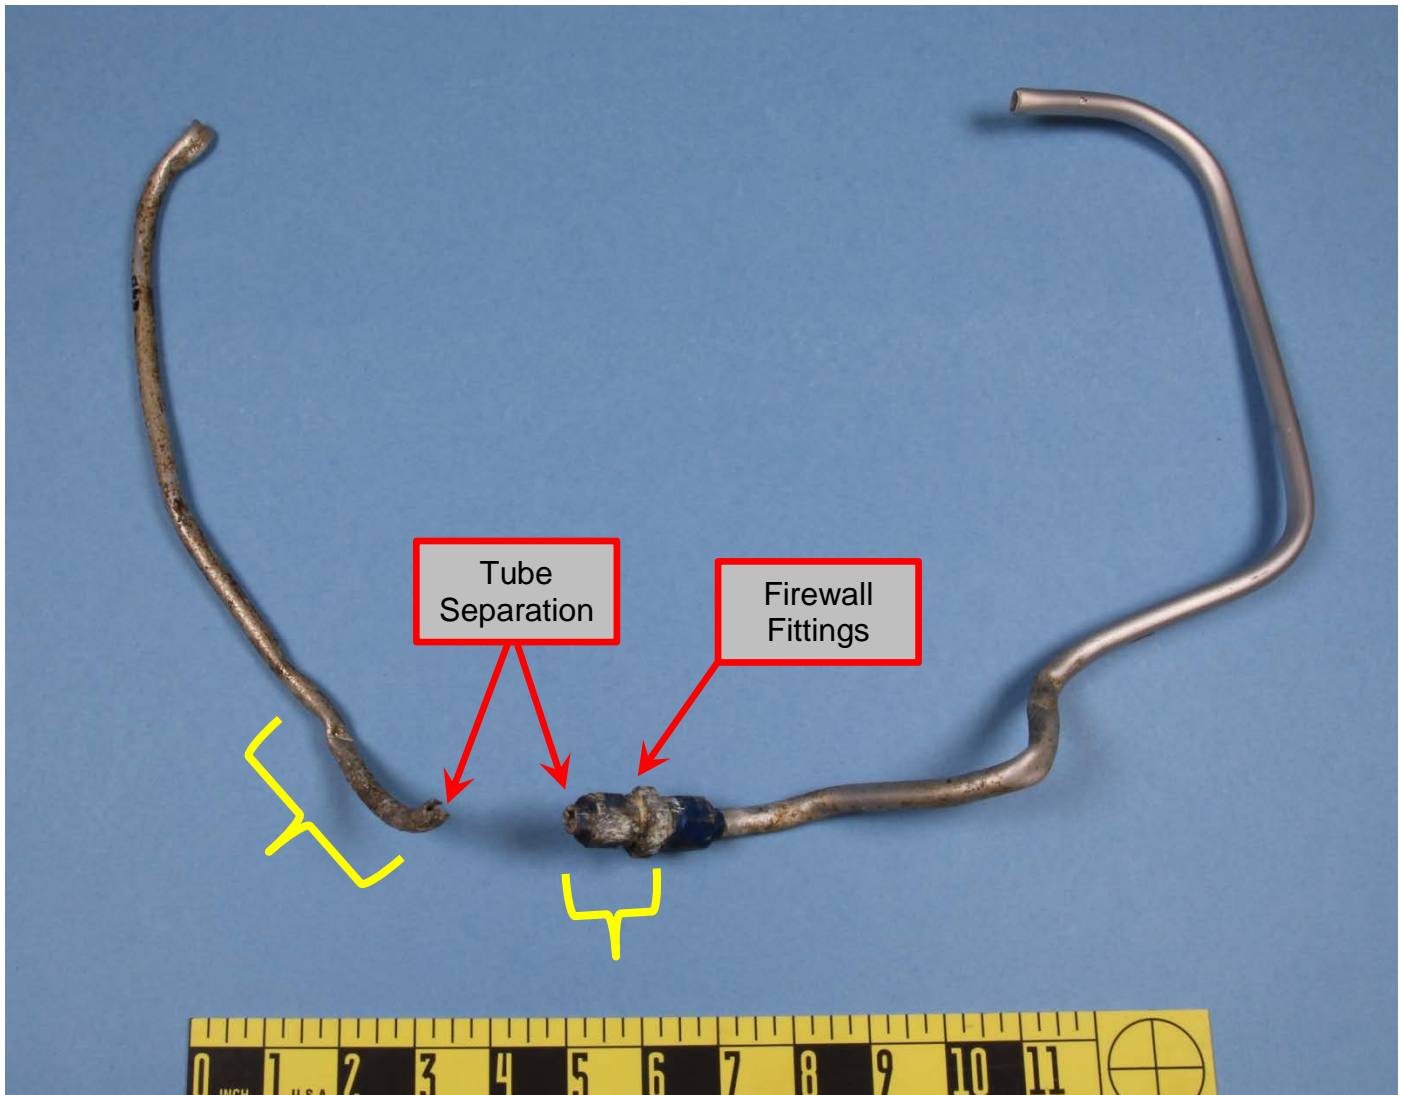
Overall view of the received fuel line. The cockpit side fuel tube was separated adjacent to the firewall fittings as indicated. Areas denoted by yellow bracket were severely corroded.
